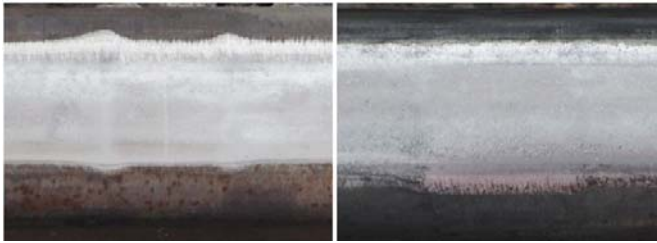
(Left) Surface photo of an untreated test weld (Right) Surface photo of a HAZ treated test weld
